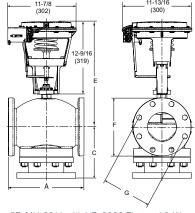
MK-6811 with VB-8303 Flanged 3-Way Globe Valves ^a
